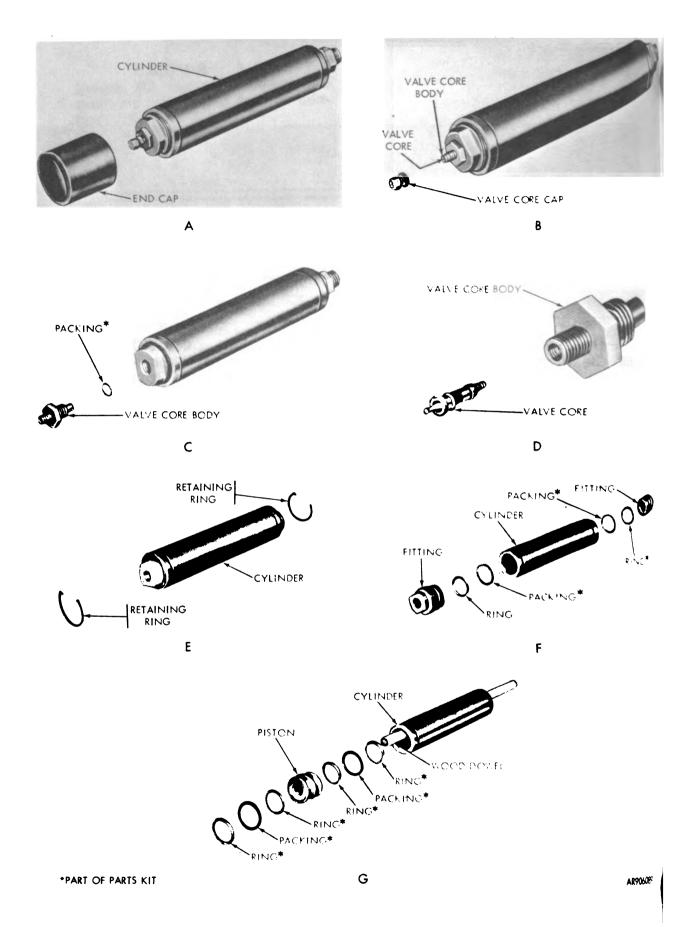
Manual elevation accumulator disassembly or assembly.
